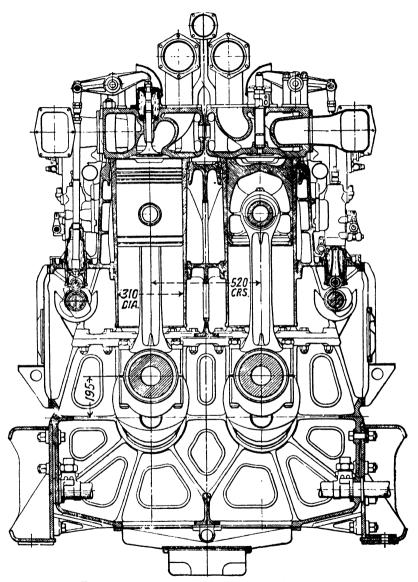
B. Cross-section of 2200 h.p. Sulzer engine.
